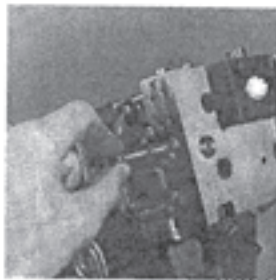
Remove Servo Pressure Supply Shuttle Spool
